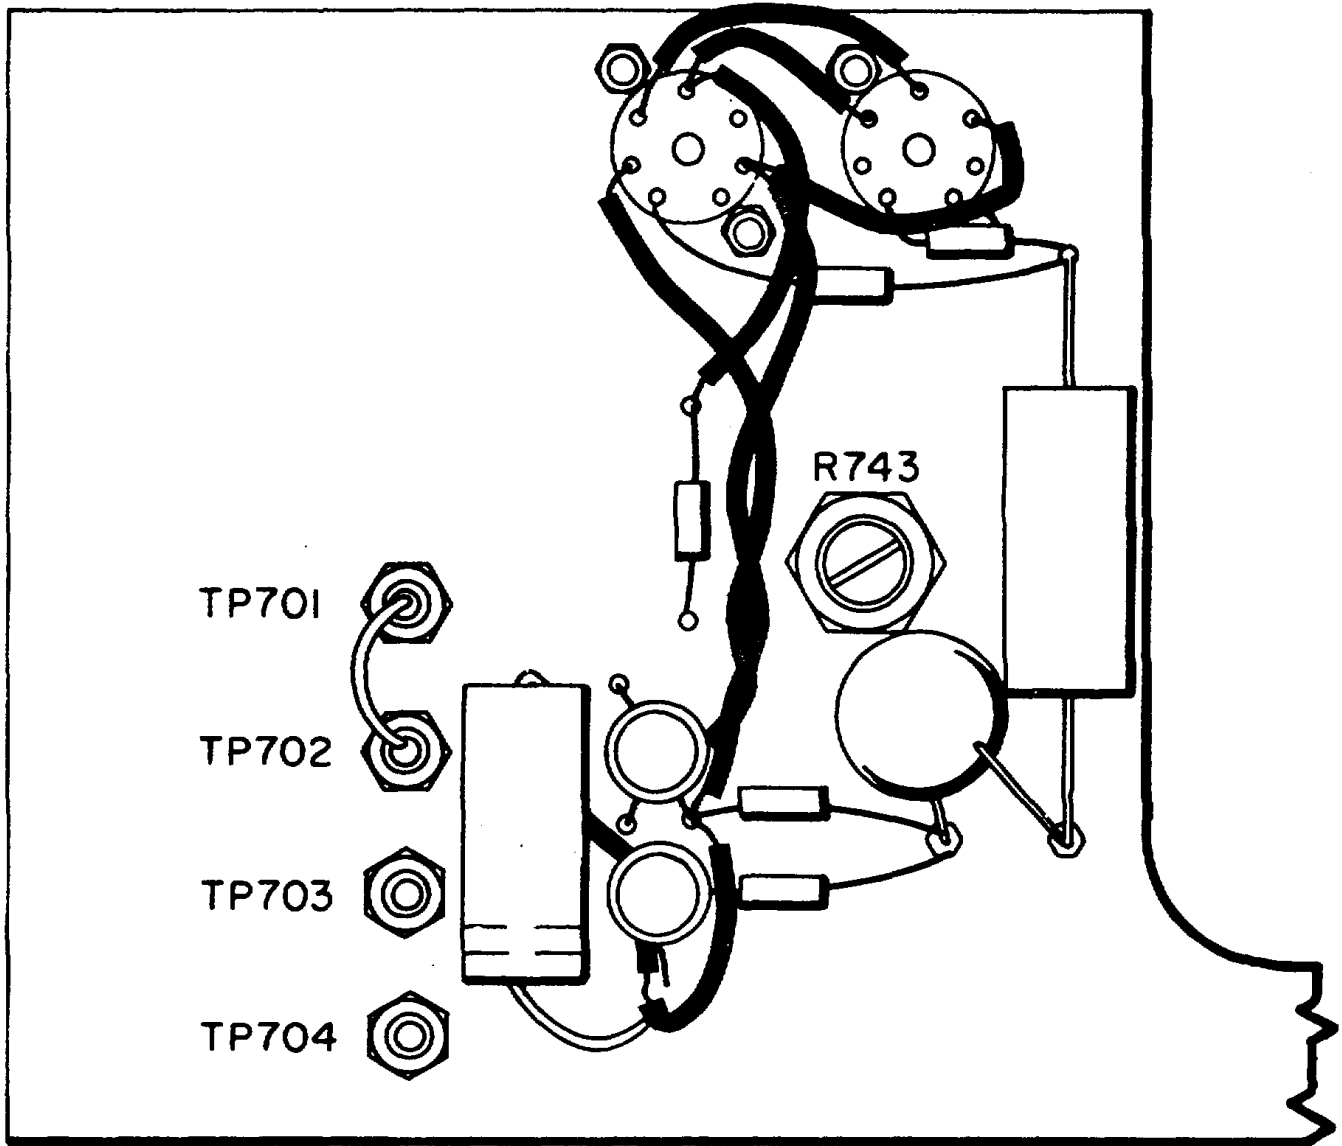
PRD 816-S10 Power Supply - Side View Showing Test Points
